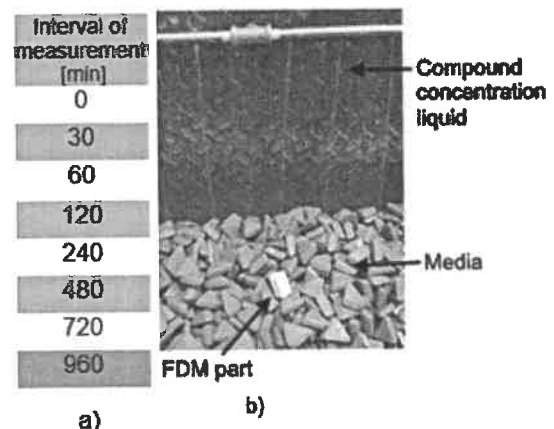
a) Interval of measurement. b) Giant vibratory finishing machine
